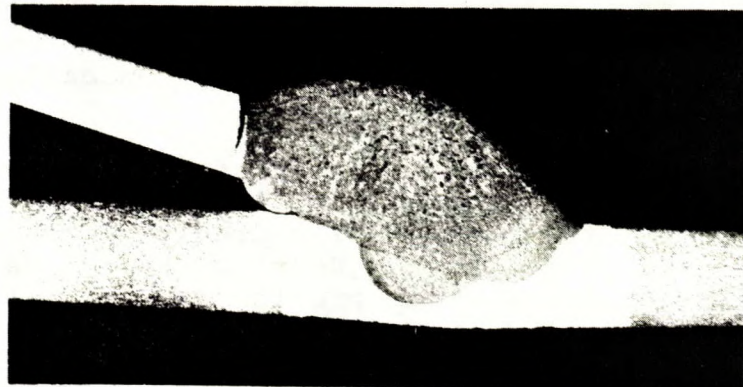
Section through 1/8 in. long crack indication found by penetrant inspection at fillet weld junction with connecting tube in Sample C on the side of the assembly opposite that illustrated by Figures 4 and 19 for Samples A and B respectively.
